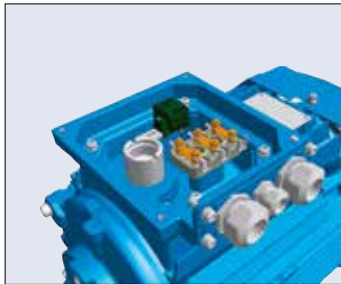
Terminal box for motor sizes 355 to 400, with adapter and cable sealing end unit.
